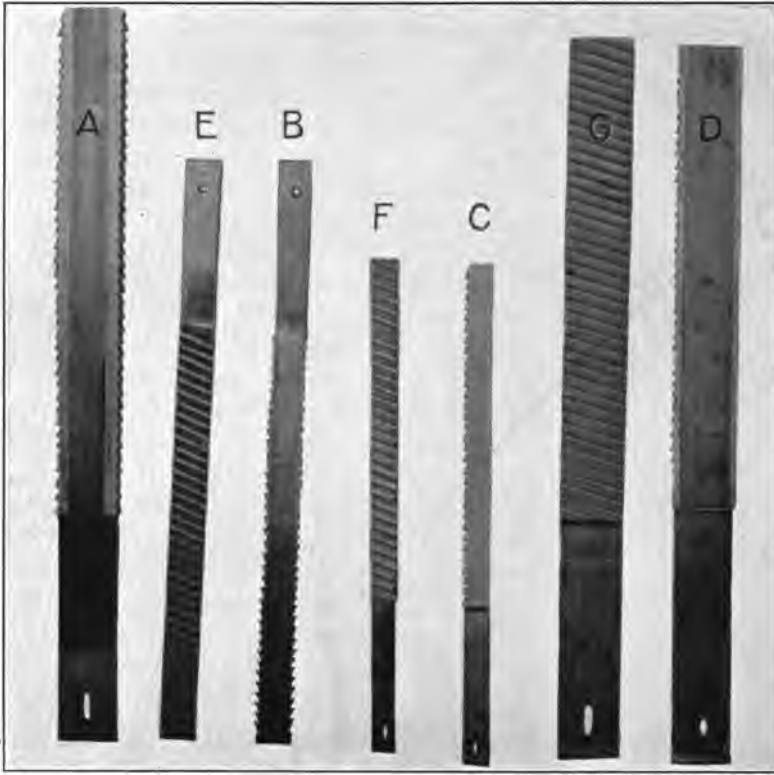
Diagonal-tooth broaches for rectangular holes.
